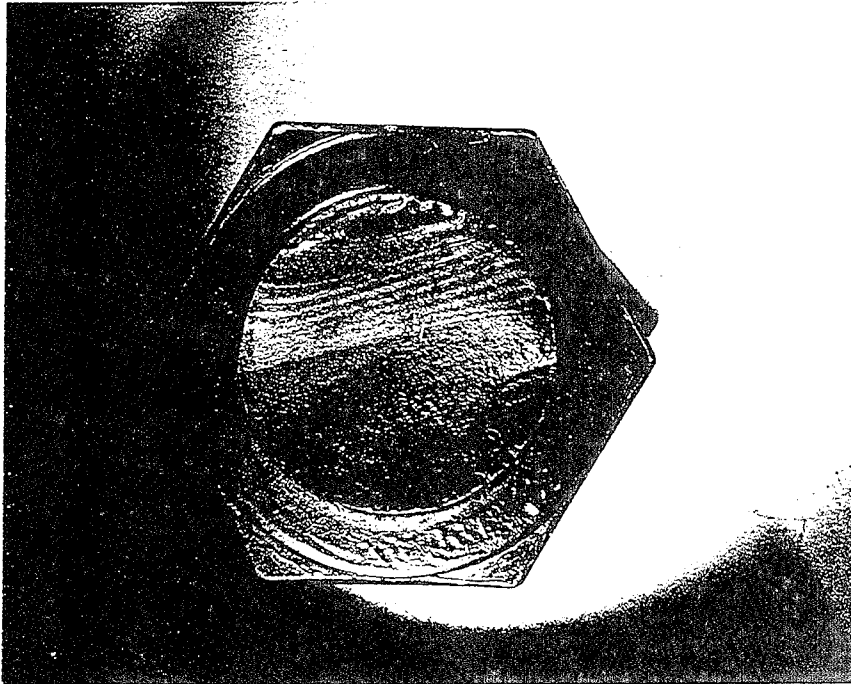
Fracture face of Grade 5 bolt, showing fatigue "beach marks" . Apx 2x, unetched
